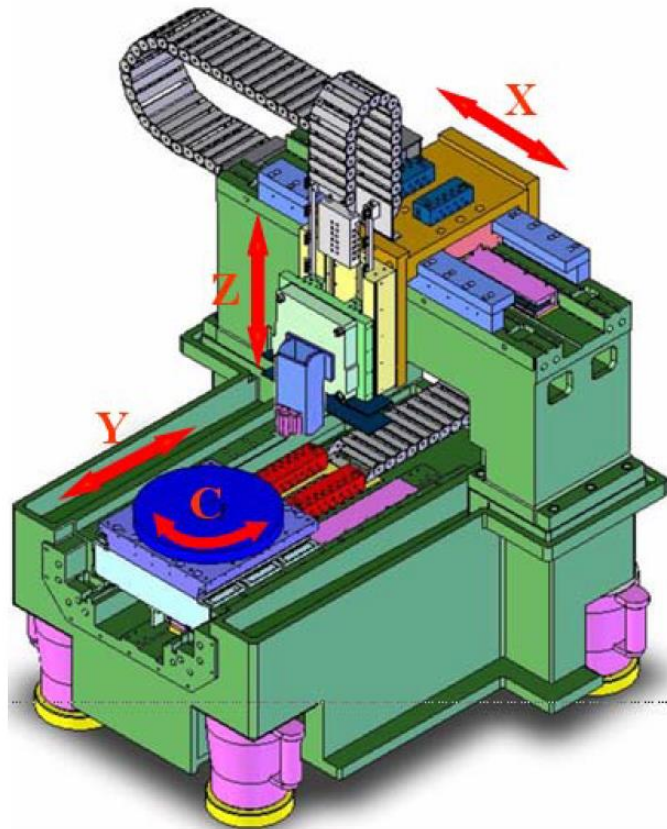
Schematic of the ultra-precision machine tool [22].
